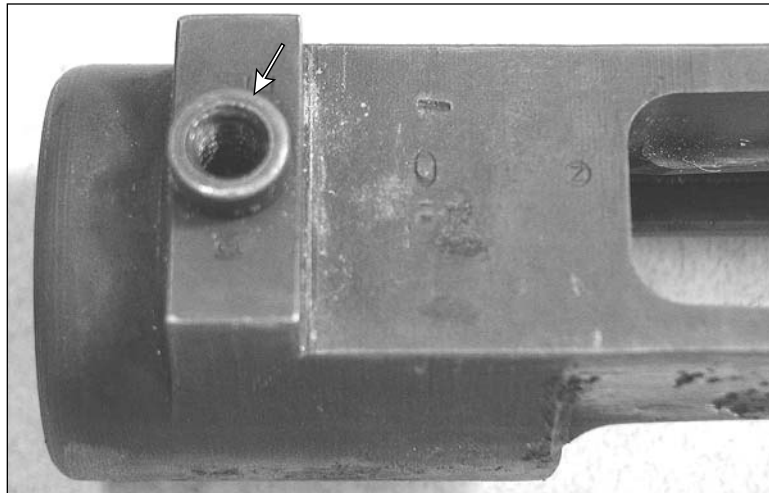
B: Mauser front guard screw threads into bottom of recoil lug.
